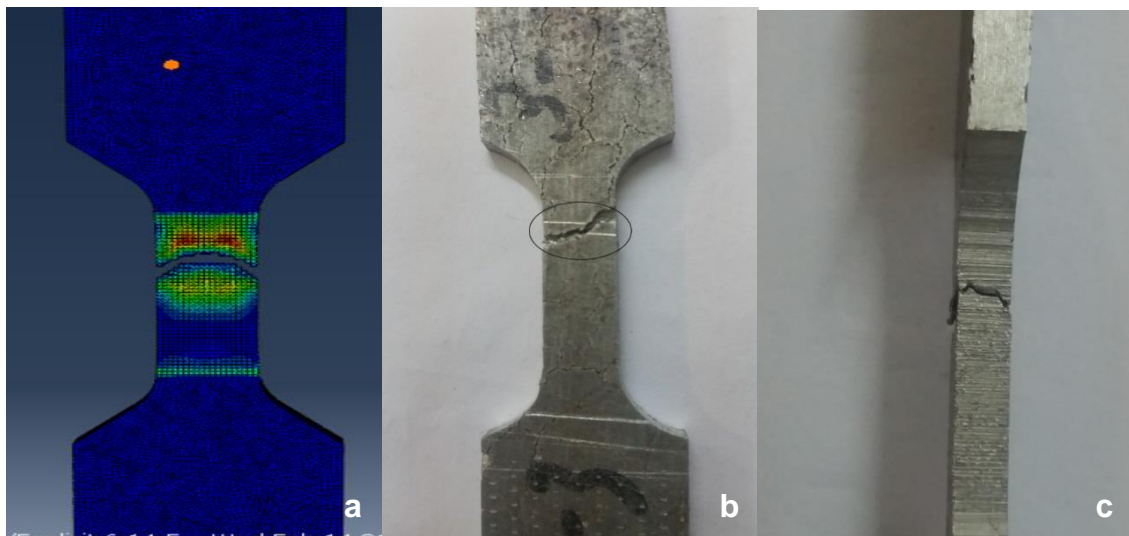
Fracture geometries. (a) Simulated fracture geometry (b) Fracture geometry from the front view (c) Fracture geometry from the side view.
